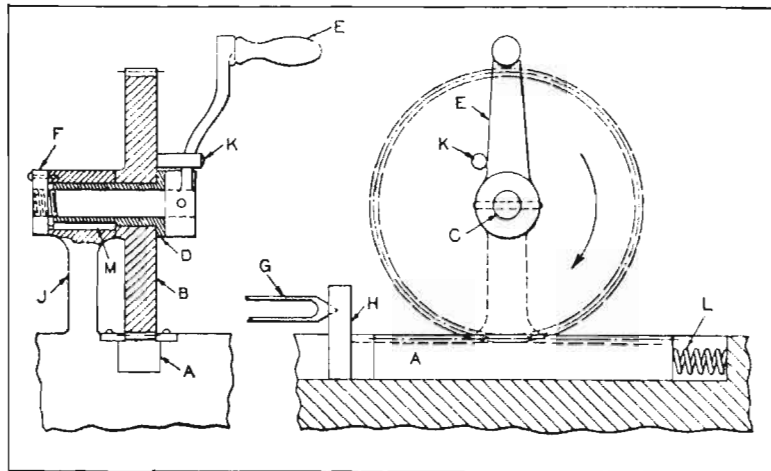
Mechanism for Clamping and Releasing Tailstock Center.
